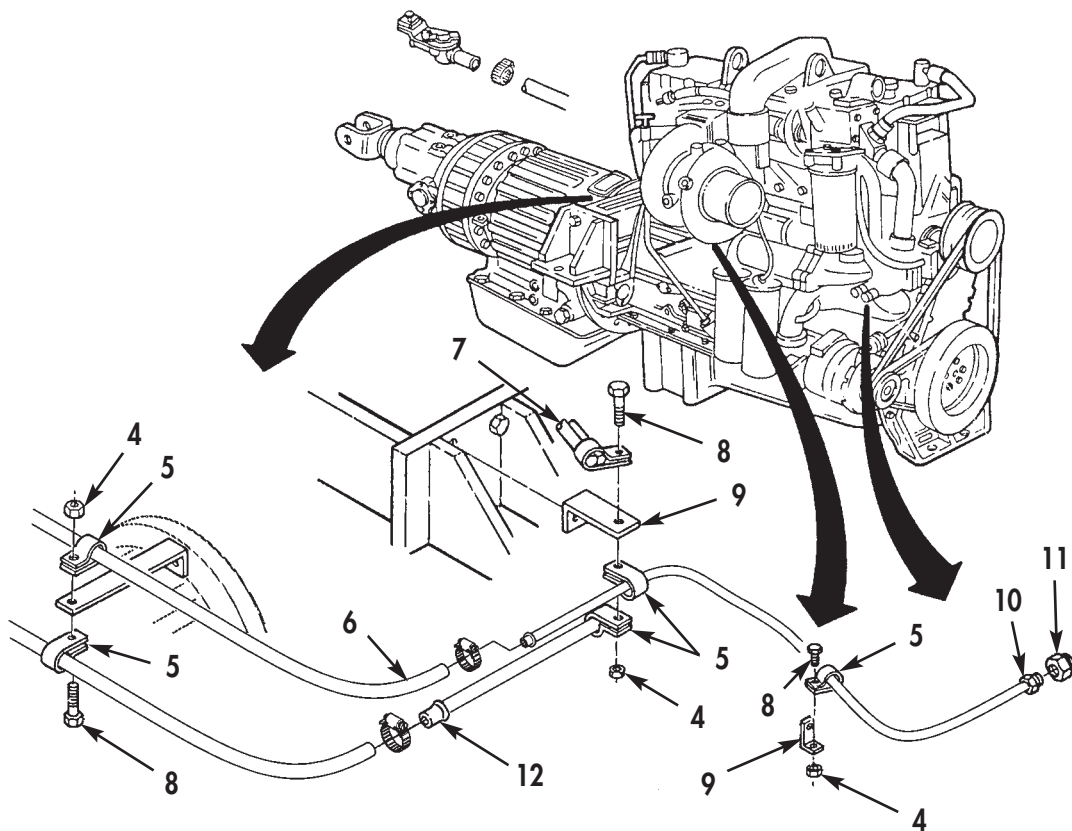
Heater Hose and Starter Wiring Harness Removal.
